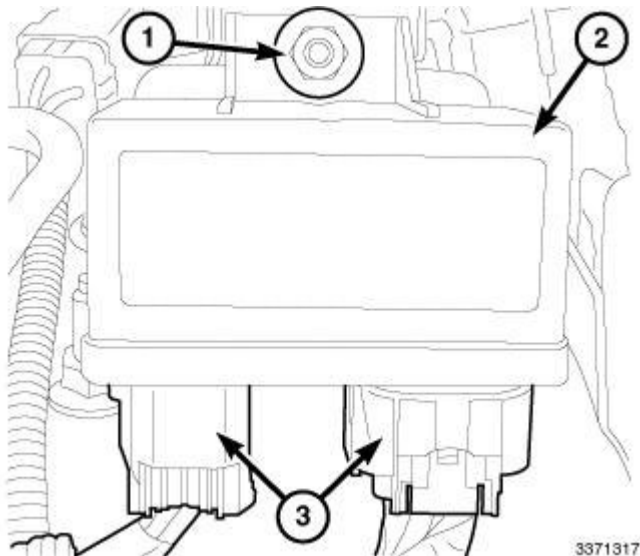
Fuel Filter Protective Shield, Bolts & Connectors
